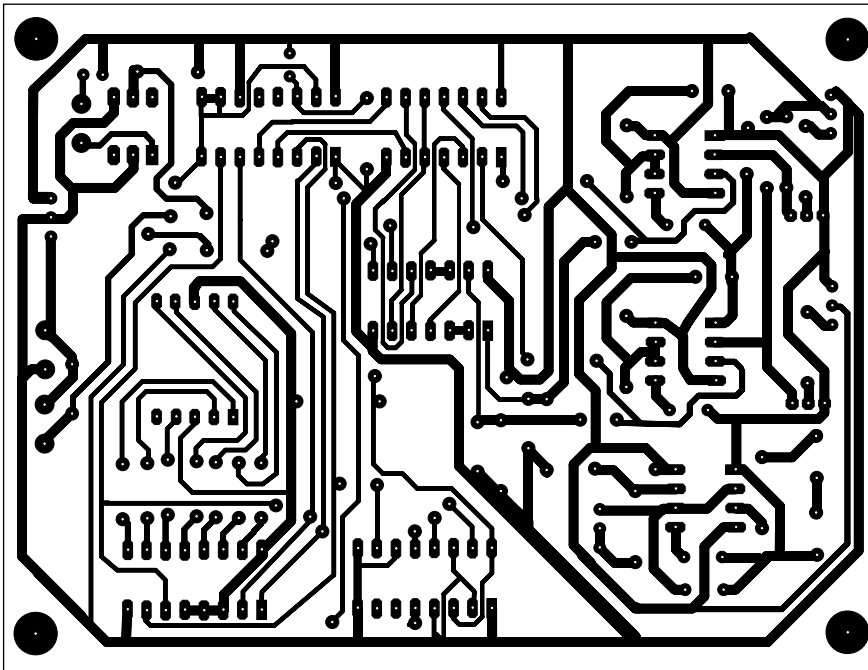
Actual-size, single-sided PCB layout for the circuit
